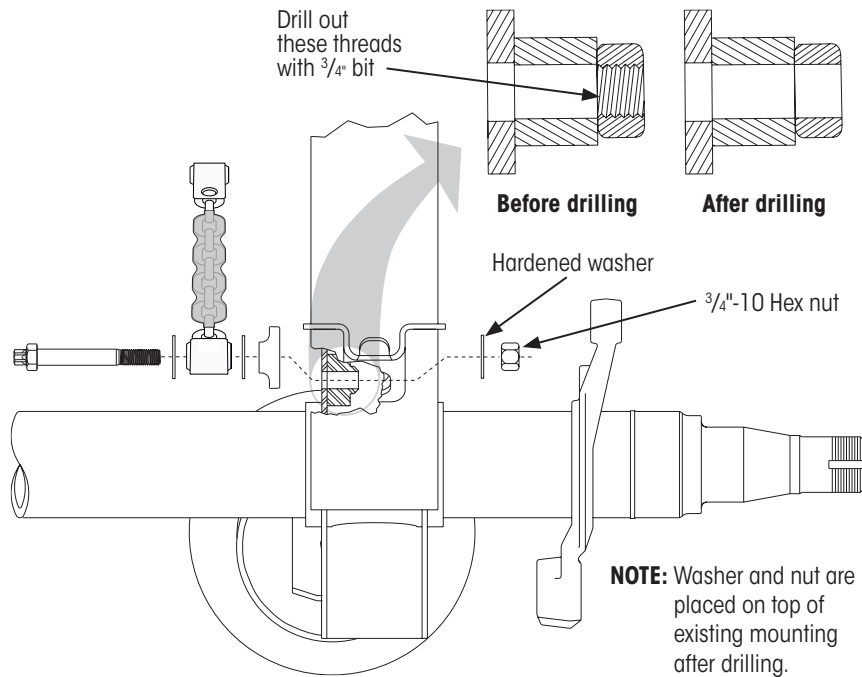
Damaged thread hardware assembly for lower mounting bolt
